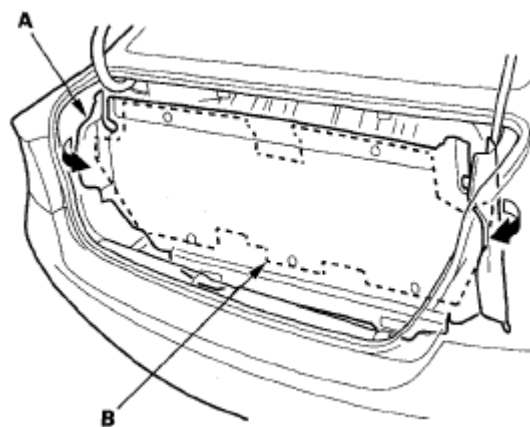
Identifying Trunk Front Trim Panel And Trunk Partition Assembly
